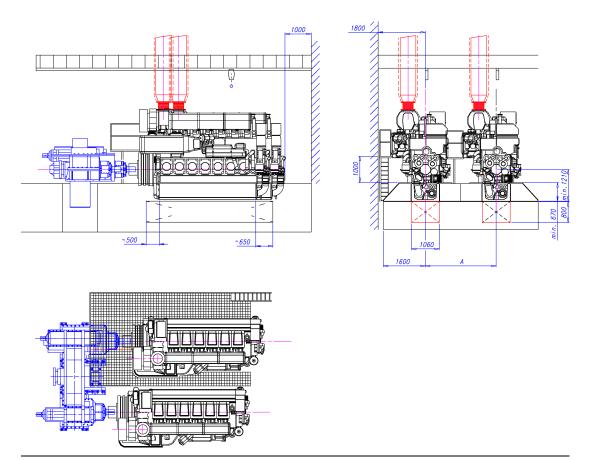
In-line engines, turbocharger in driving end (DAAE030105a)
